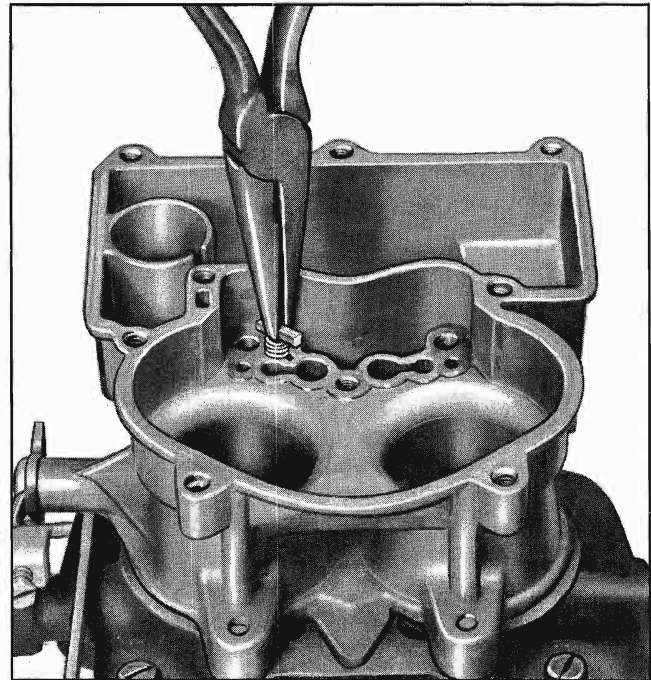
B-23 Removing Pump Discharge Spring Retainer
